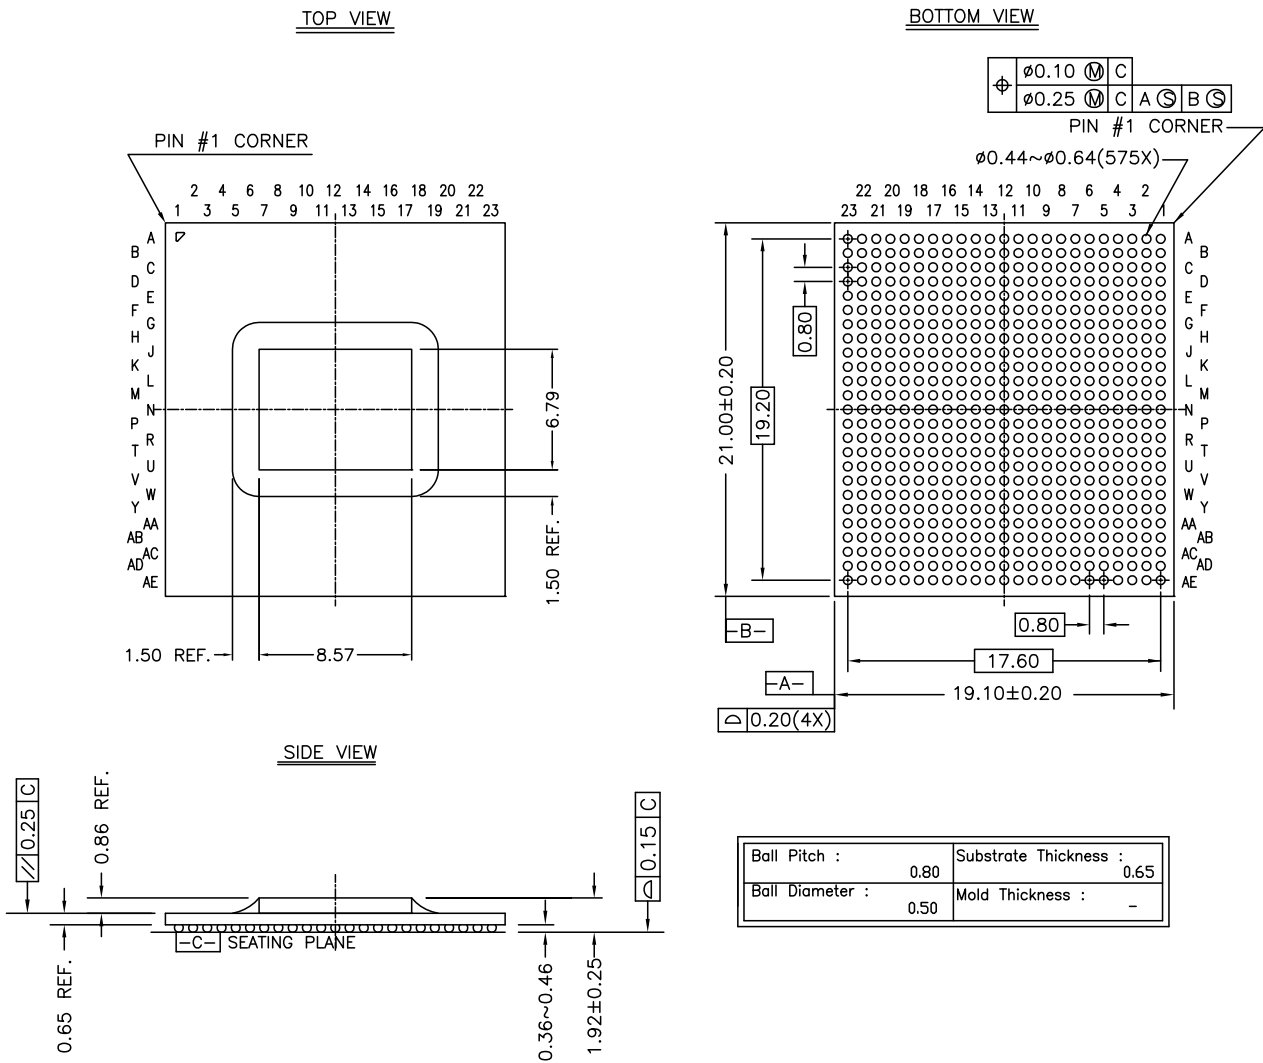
Mechanical Dimensions – 19 x 21 mm² Package without Heat Spreader
